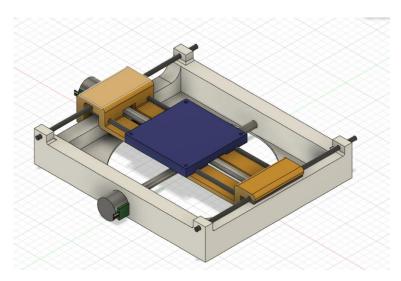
Isometric view of XY mechanism with 5V stepper motors
